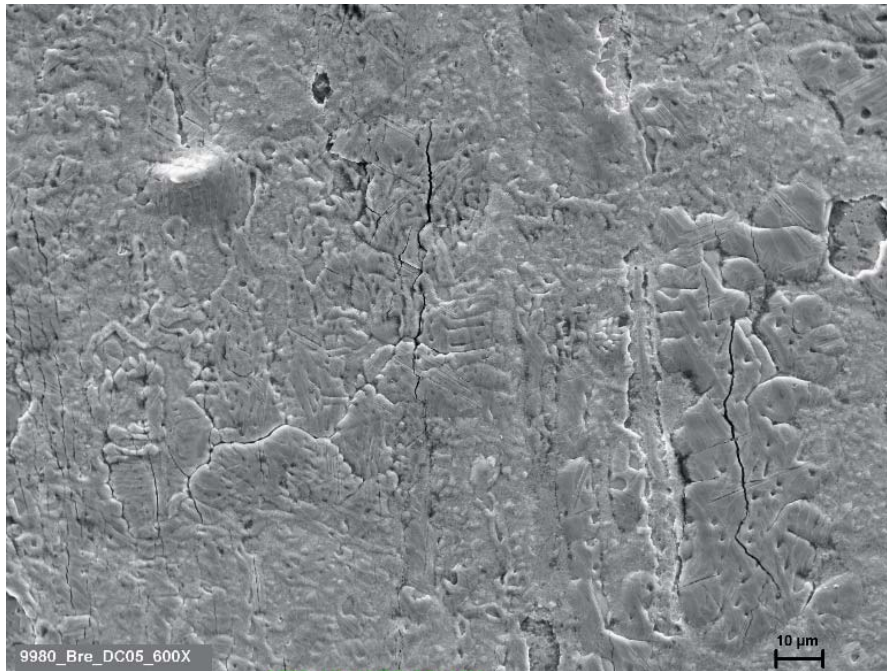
Micro cracks near welding seam in DC05 after bending and unbending
